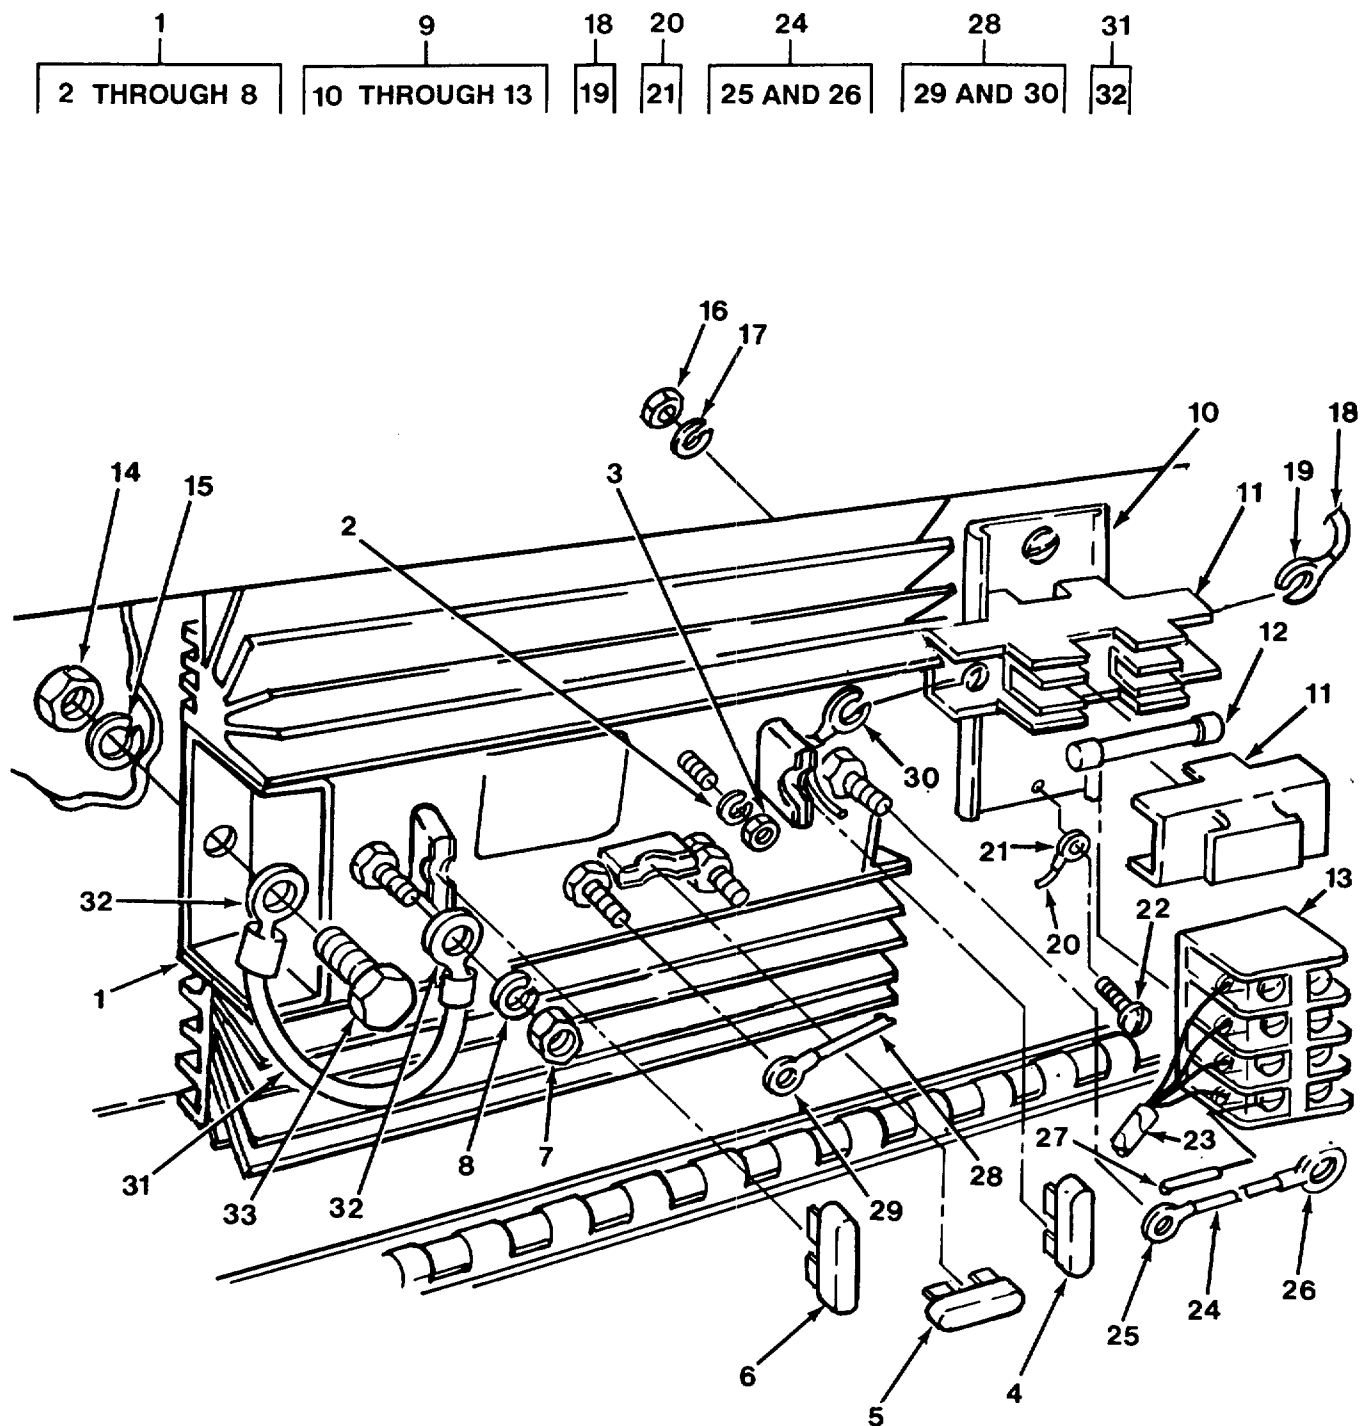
VOLTAGE REDUCER/WIRING ASSEMBLY
